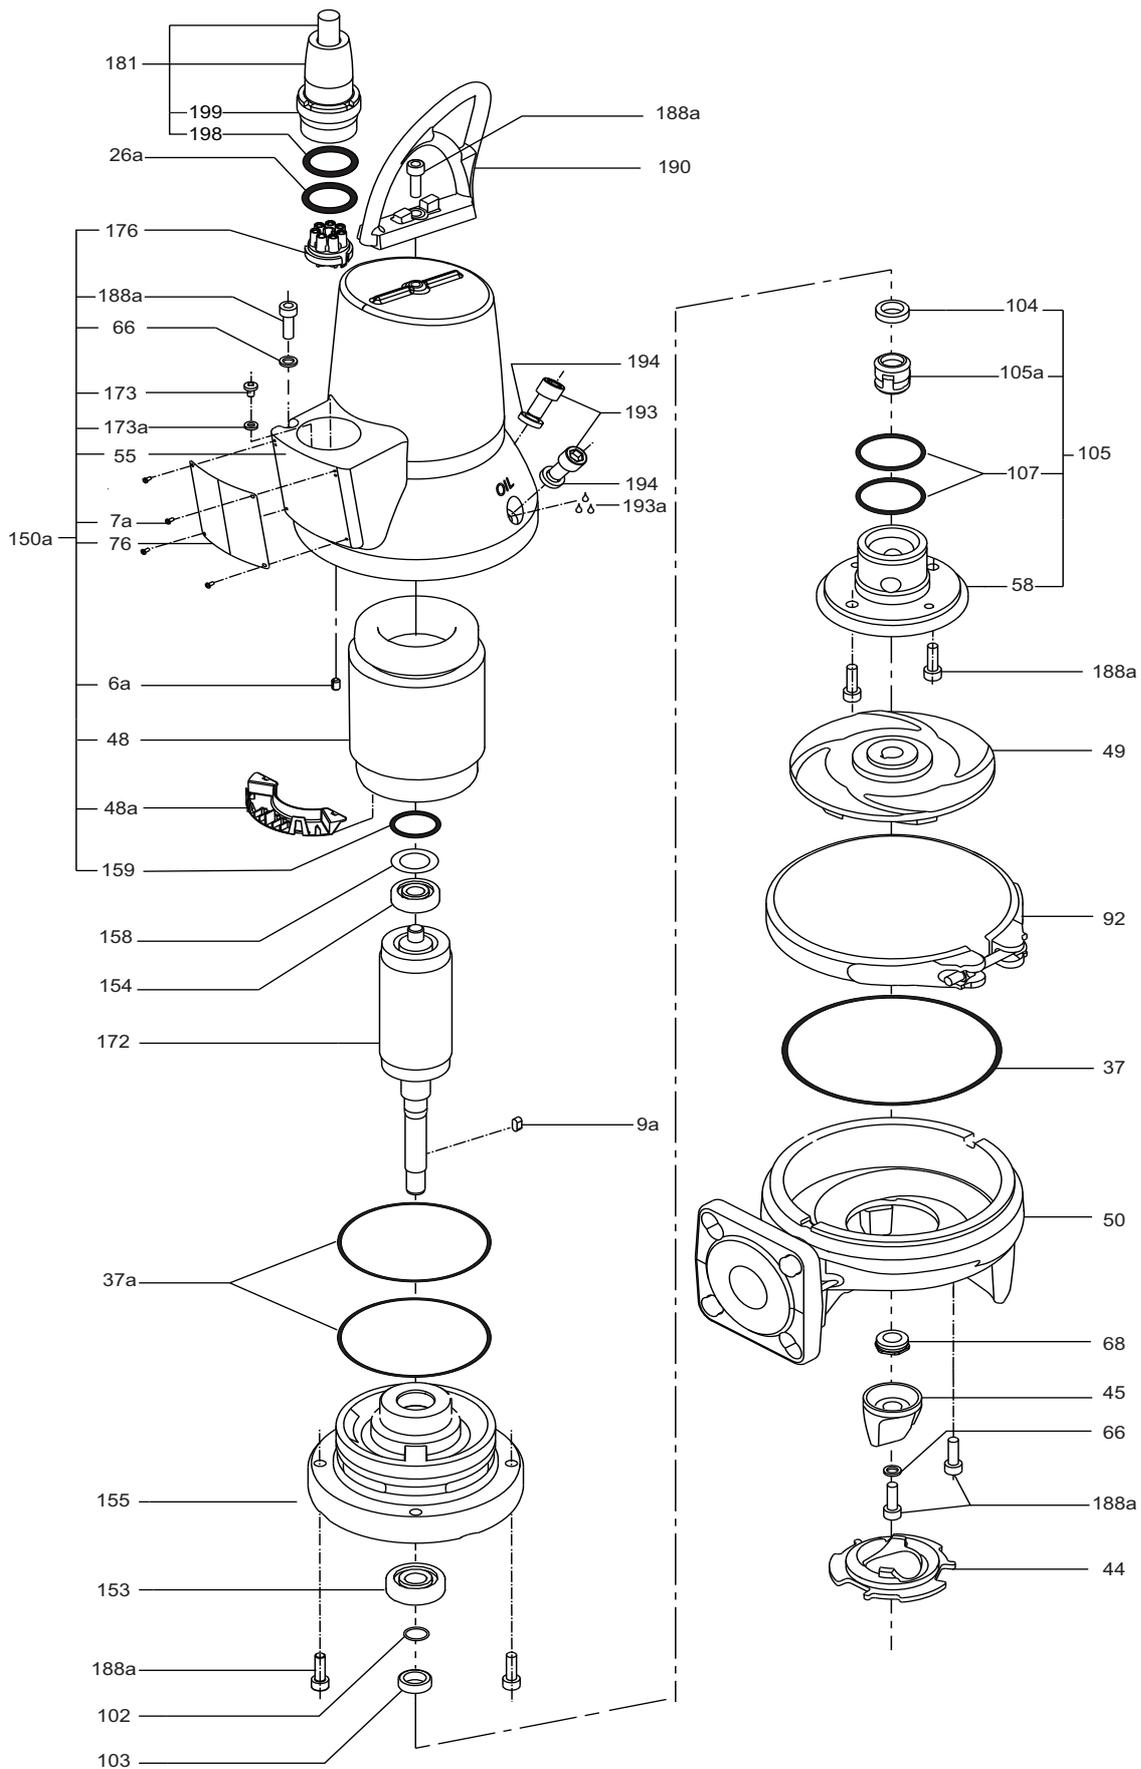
Exploded view of SEG pumps, 0.9, 1.2 and 1.5 kW
